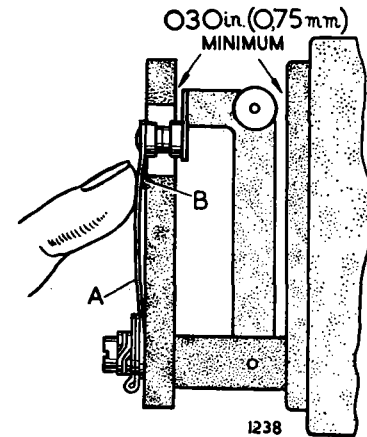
If the contact blade "A" is held against the projection "B" there should be .030" (0.75 mm.) gap between the white rollers and the body of the pump. If necessary, set the tip of the blade to obtain the correct clearance.
